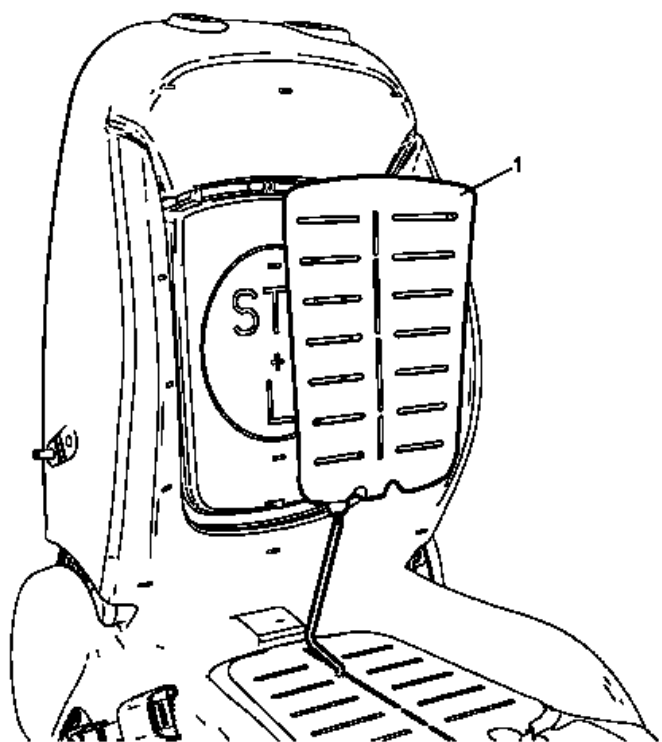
Driver or Passenger Seat Back Cushion Heater Mat
